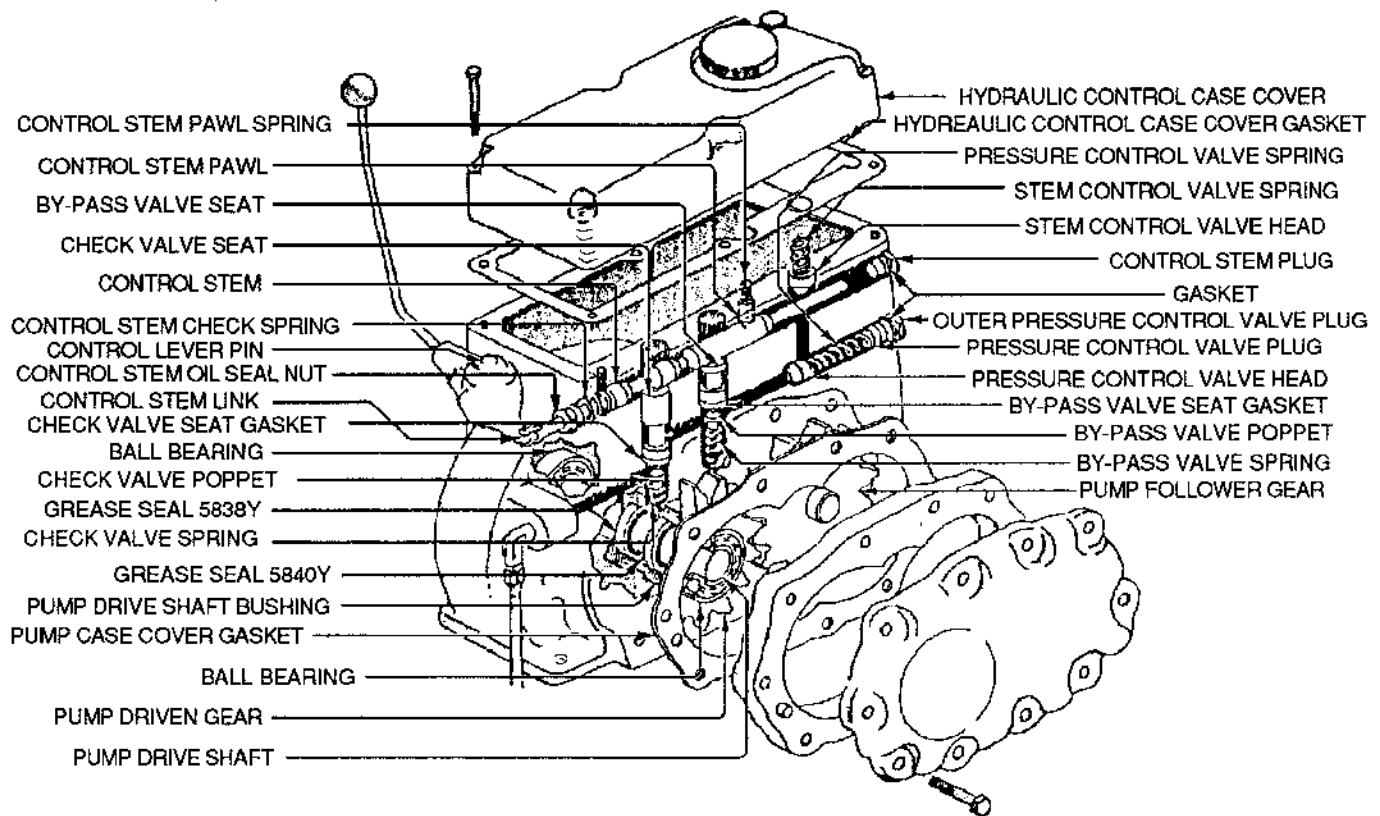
HYDRAULIC CONTROL SYSTEM ADJUSTMENTS
